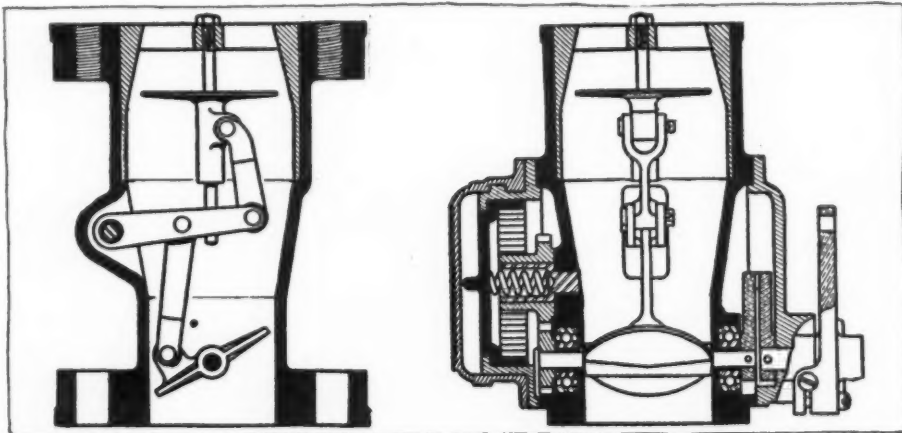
Sections through Kramer engine governor showing operating disk which is raised or lowered according to the speed of the incoming gases, thus opening or closing the butterfly valve below
